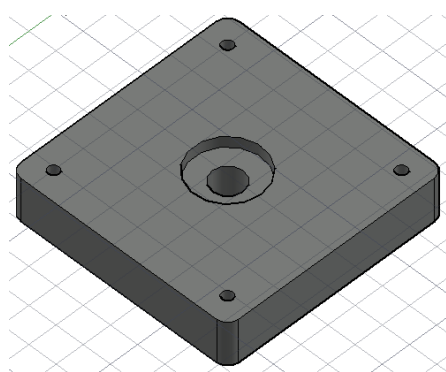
Design of clamp Fig. 6.4. Test setup assembly with clamp
